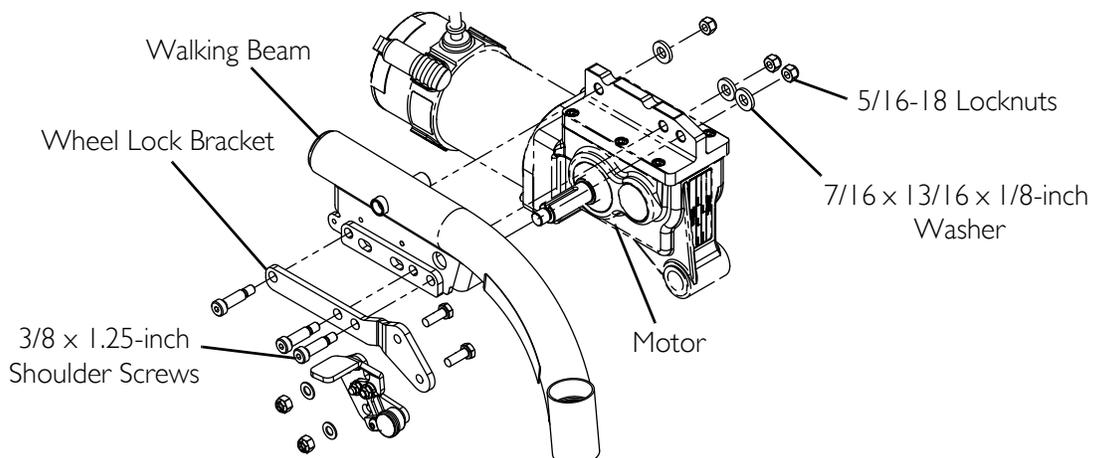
Removing/Installing the Wheel Lock Bracket
